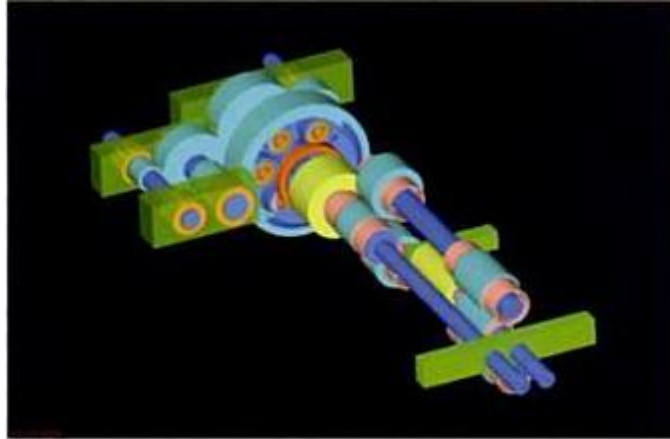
Torsion shaft gearbox design (KOHLGRUBER, Klemens, 2007).
